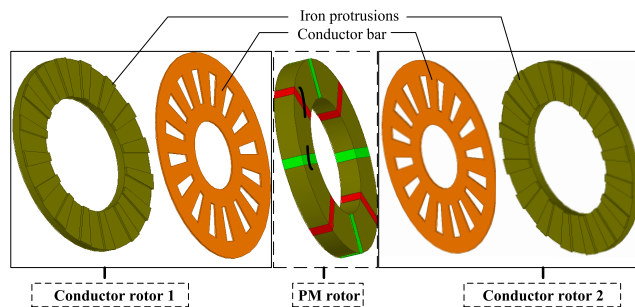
Exploded view of flux-focusing eddy current coupling with double slotted conductor rotors.
